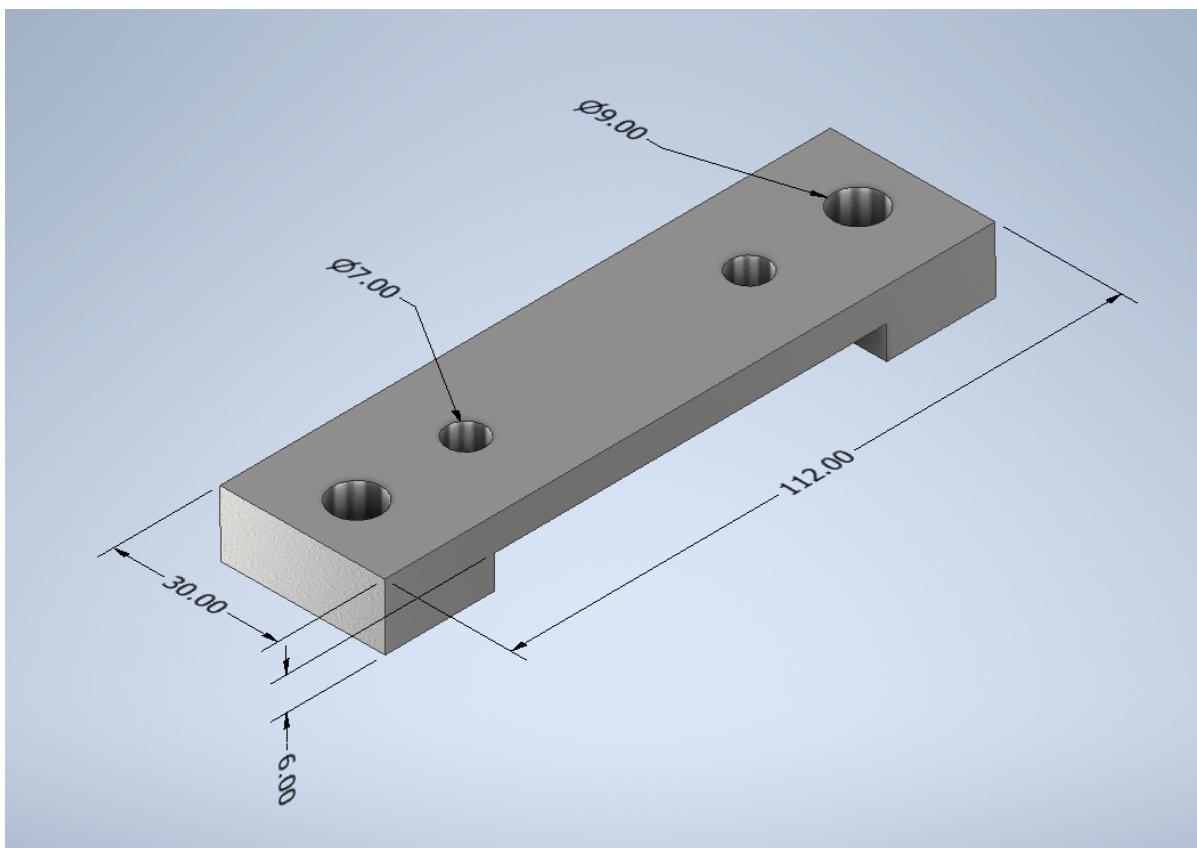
CAD image of 3D printed adapter to convert M8 mounting points to M6 mounting points. Used for occasional integration of old components.
